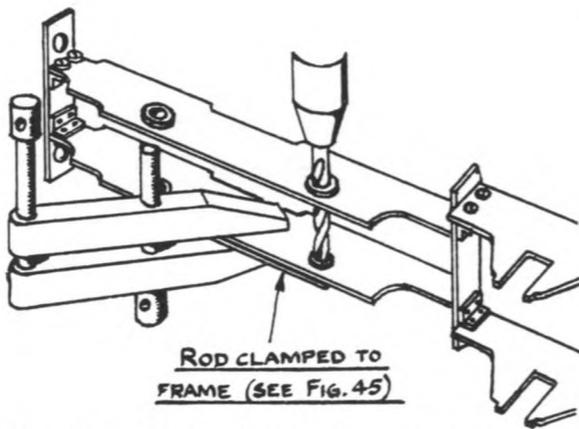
Spotting through into the coupling rod blank through axle bushes.
